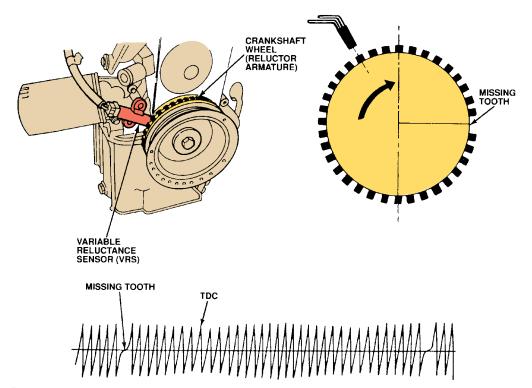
Sensor activity to monitor engine speed and crankshaft position, as well as the location of the number one piston. *Courtesy of Ford Motor Company
